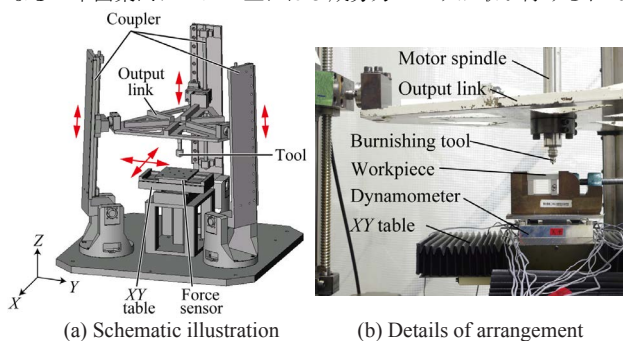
Spherical 5-DOF hybrid-type parallel mechanism with rotary tool
